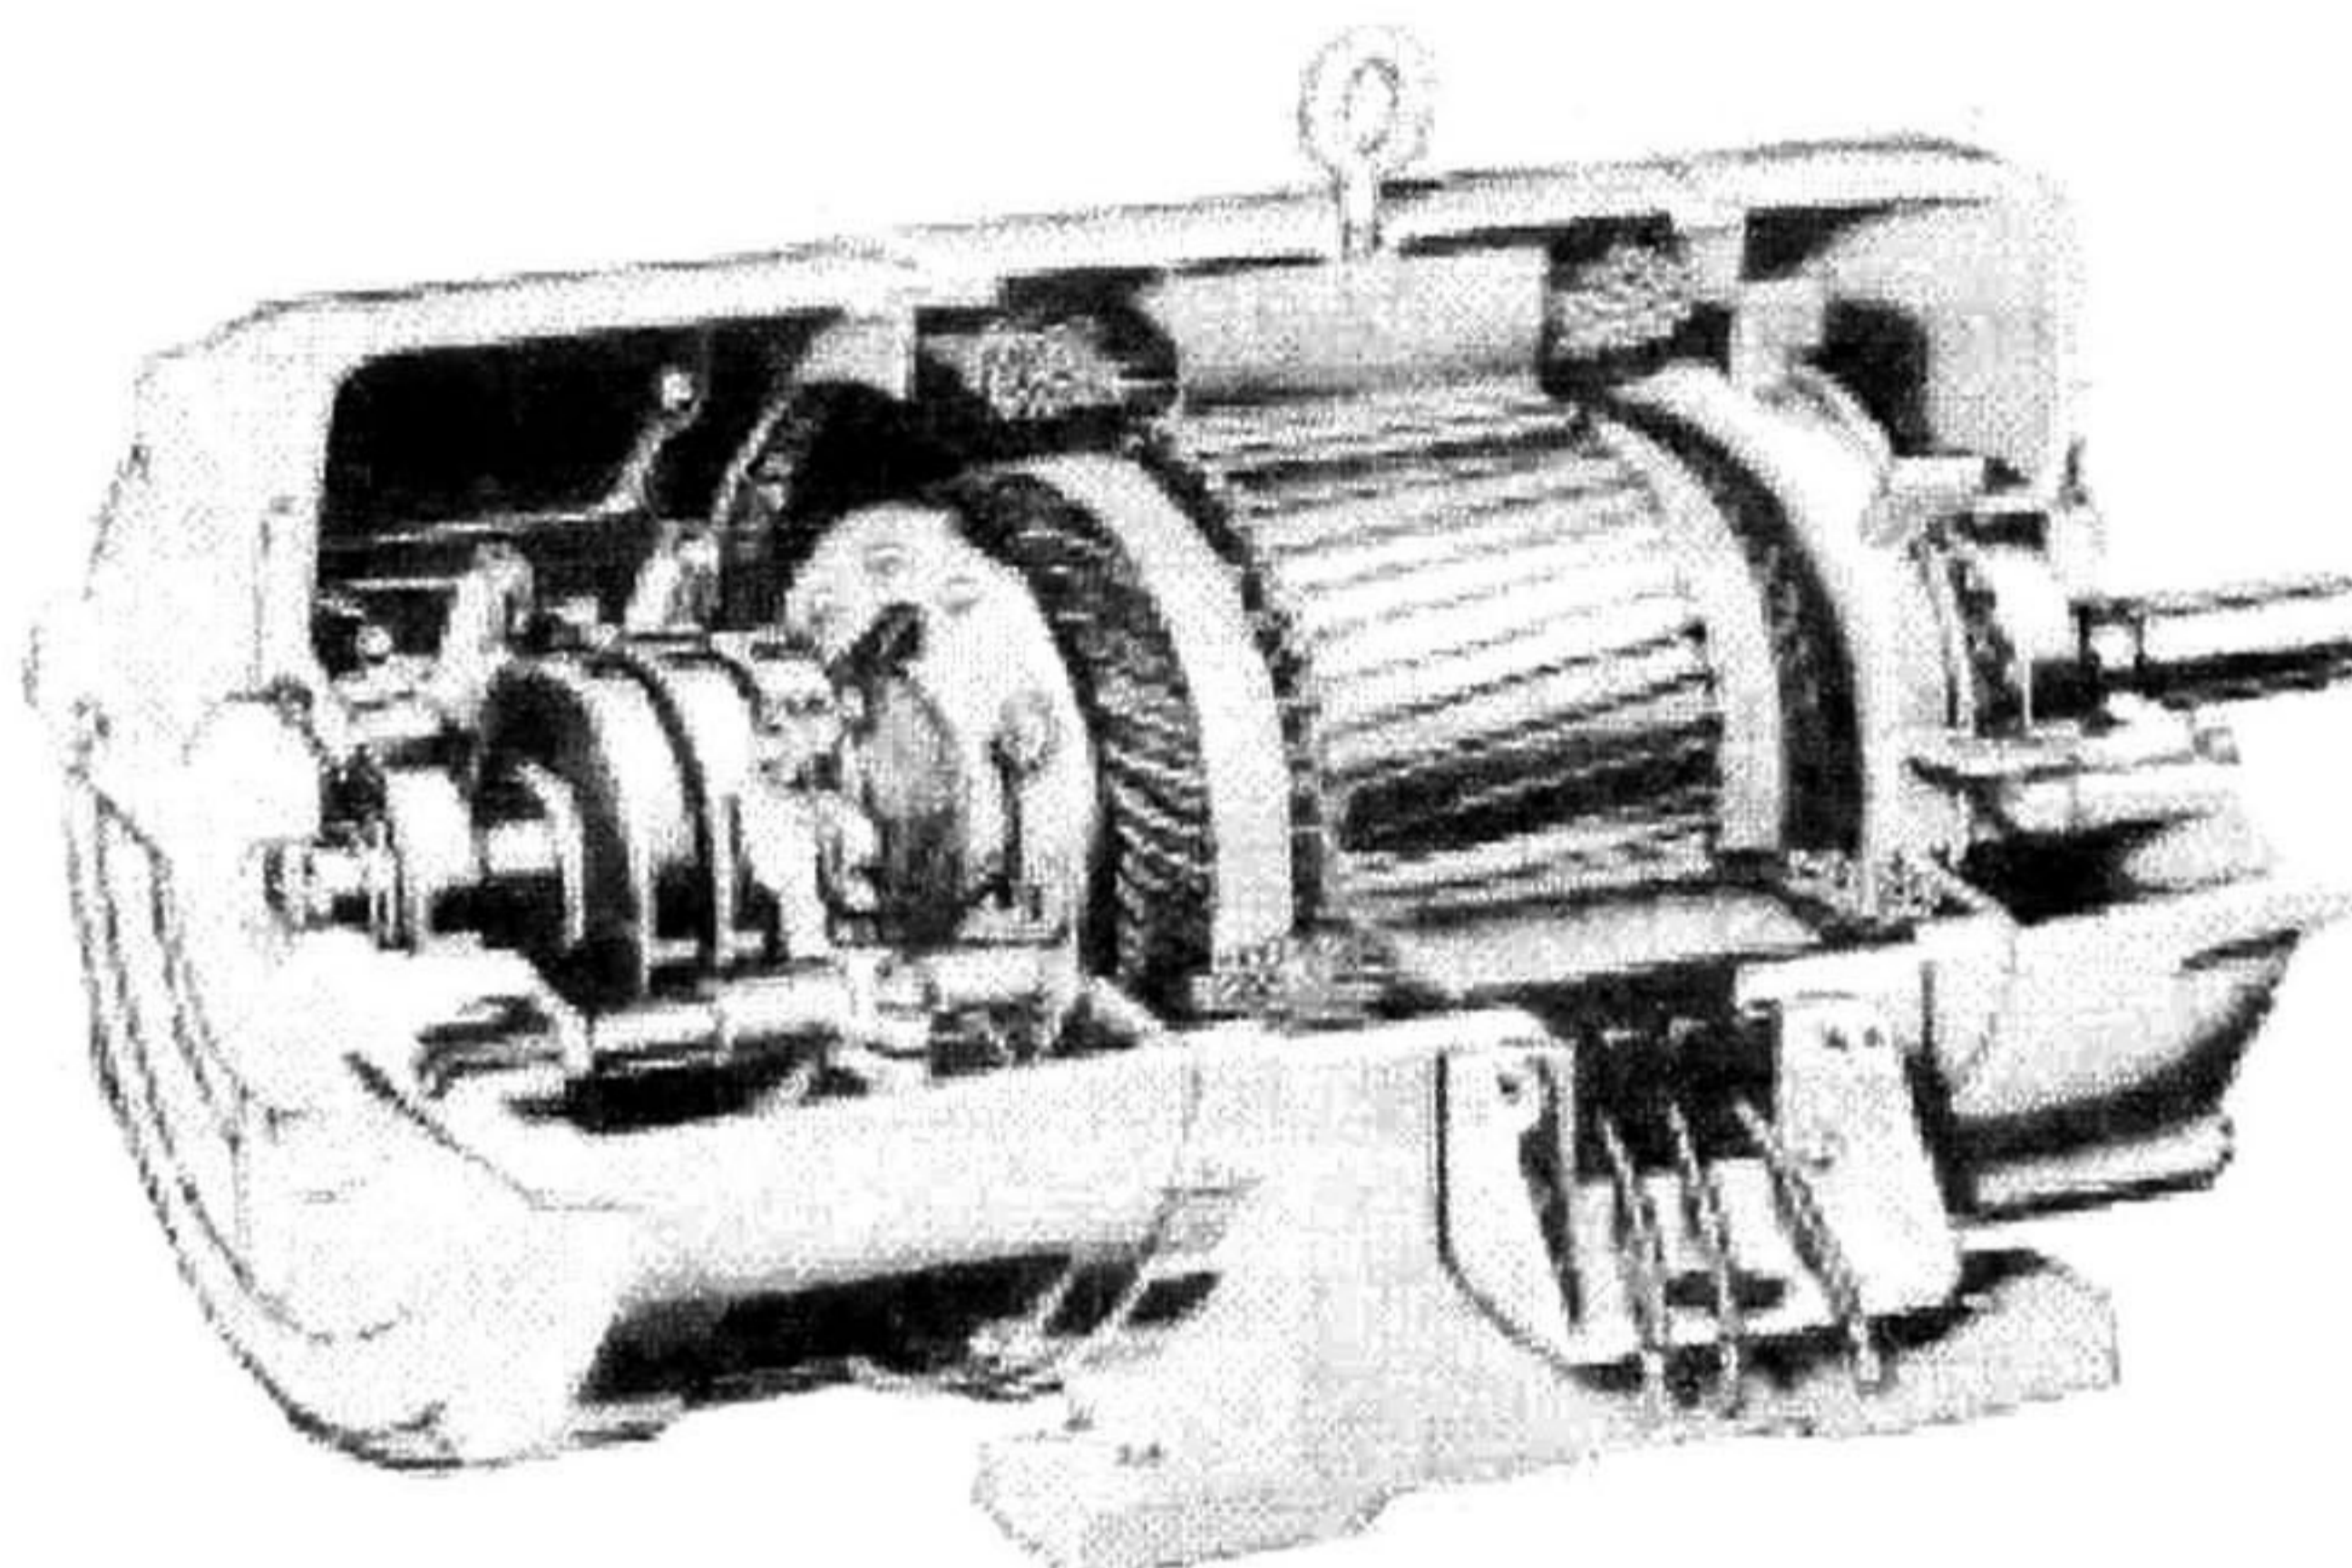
An inside view of a wound rotor induction motor. Brushes and slightly touching rings can be seen. We can also see the rotor-winding slope to eliminate the gap harmonics.
